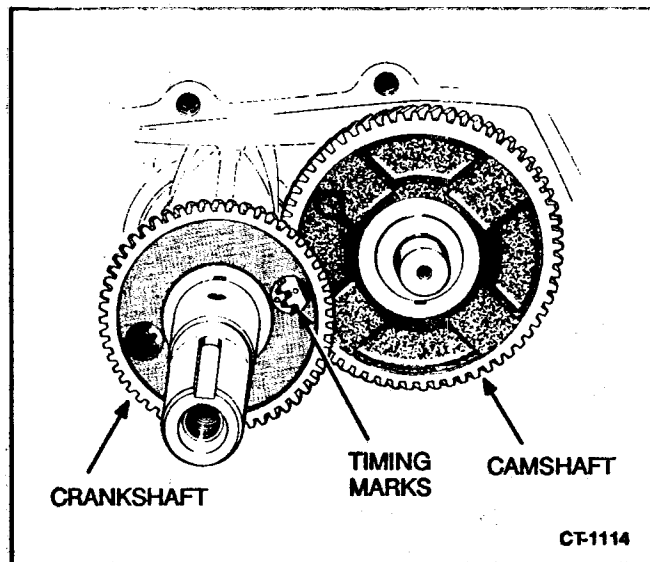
CRANKSHAFT AND CAMSHAFT TIMING MARKS
